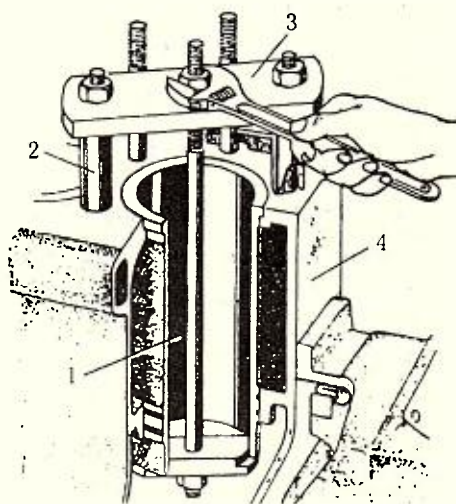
Special tools for disassembling cylinder sleeves and ways
